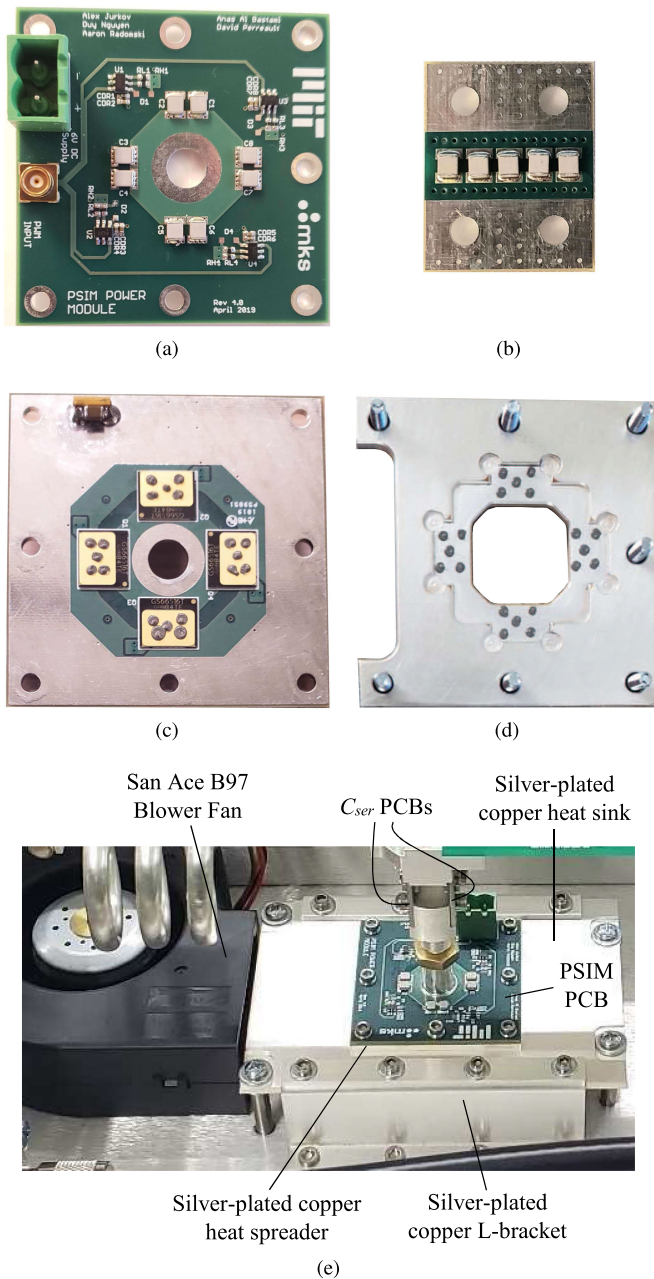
(a): Top view of PCB showing the PSIM switch drivers, shunt capacitance C_{shr} , PWM input, and dc supply; (b): Top view of one of two PCBs forming series capacitance C_{ser} ; (c): Bottom view of the PSIM PCB showing the switches, with solder paste on the source-connected cooling pad; (d): Heat spreader designed to solder to the cooling pads of the switches; and (e): Close-up photo of the full PSIM power module, with the heat sink and its L-brackets to establish a low-resistance ground connection, fan blower, and mechanical connections of the PCB-heat-spreader unit to the heat sink.
